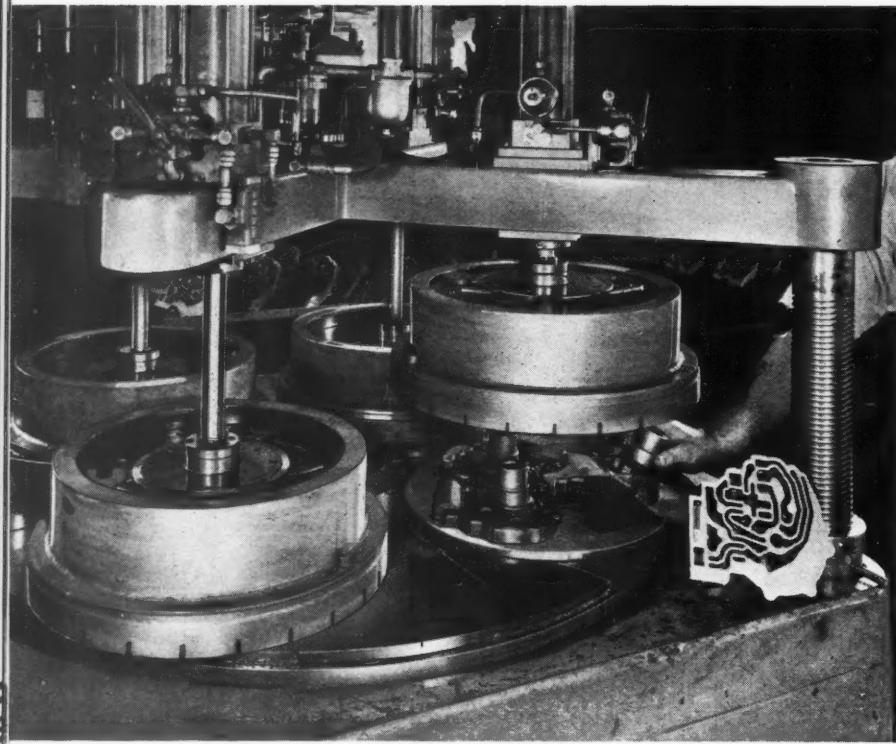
Flat sealing surfaces are produced on valve bodies for an automatic transmission in the set-up here shown.
